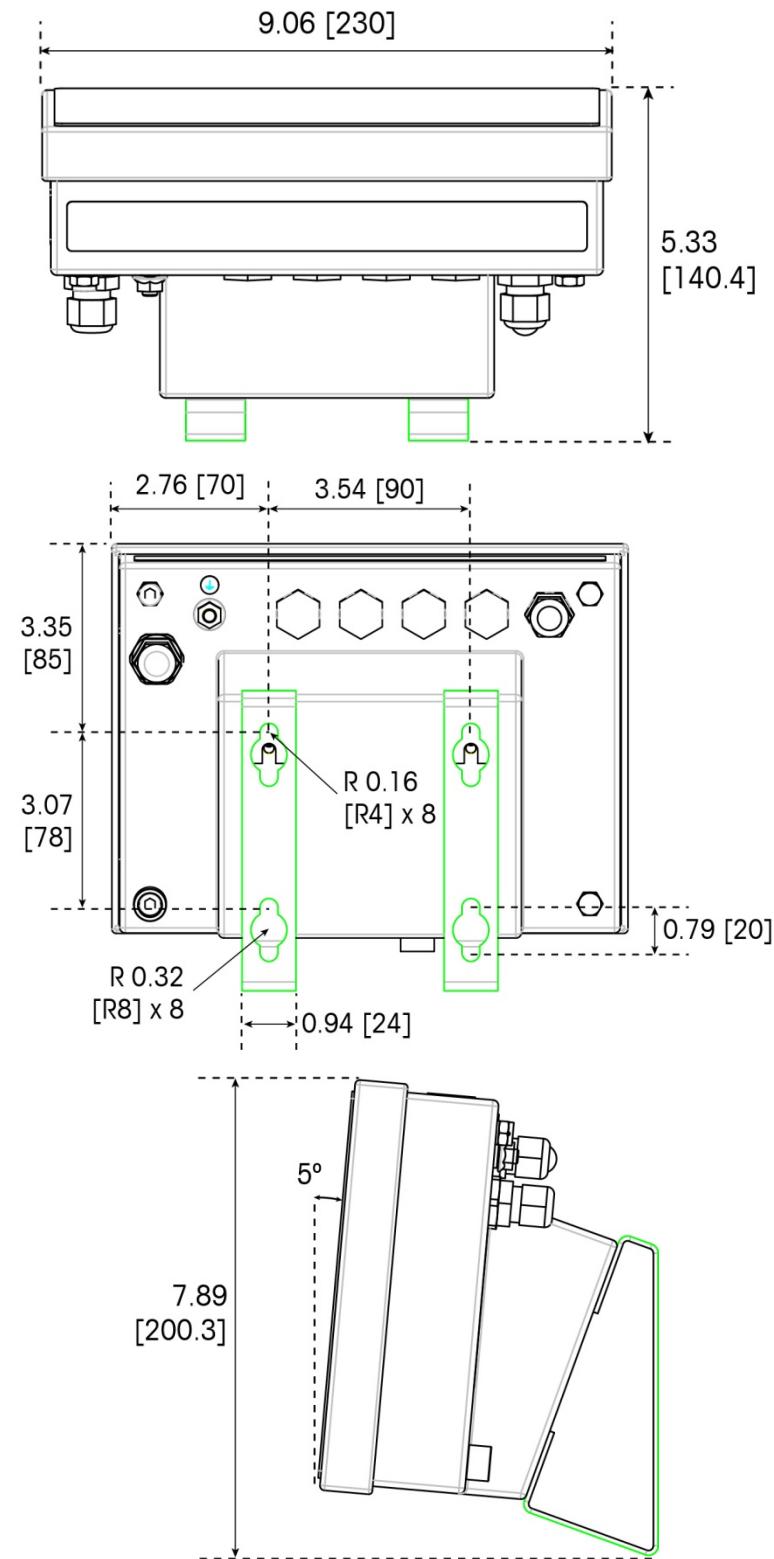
IND256x Dimensions, with Fixed Wall-Mount Bracket
